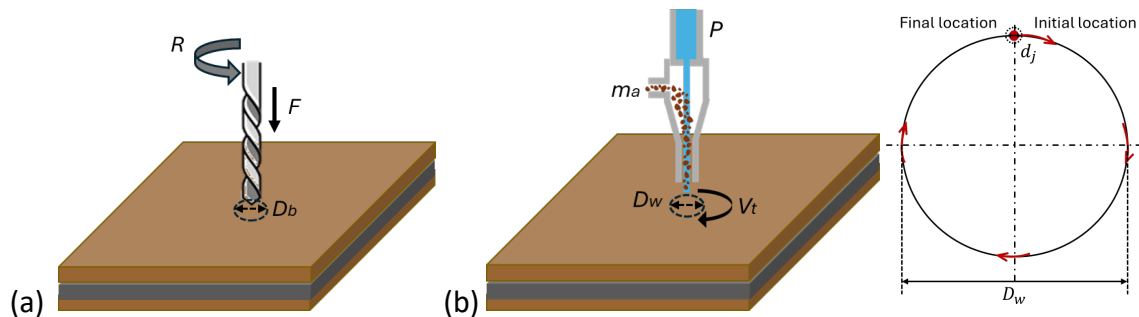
Characteristics of (a) hole drilling and (b) hole cutting using AWJ
